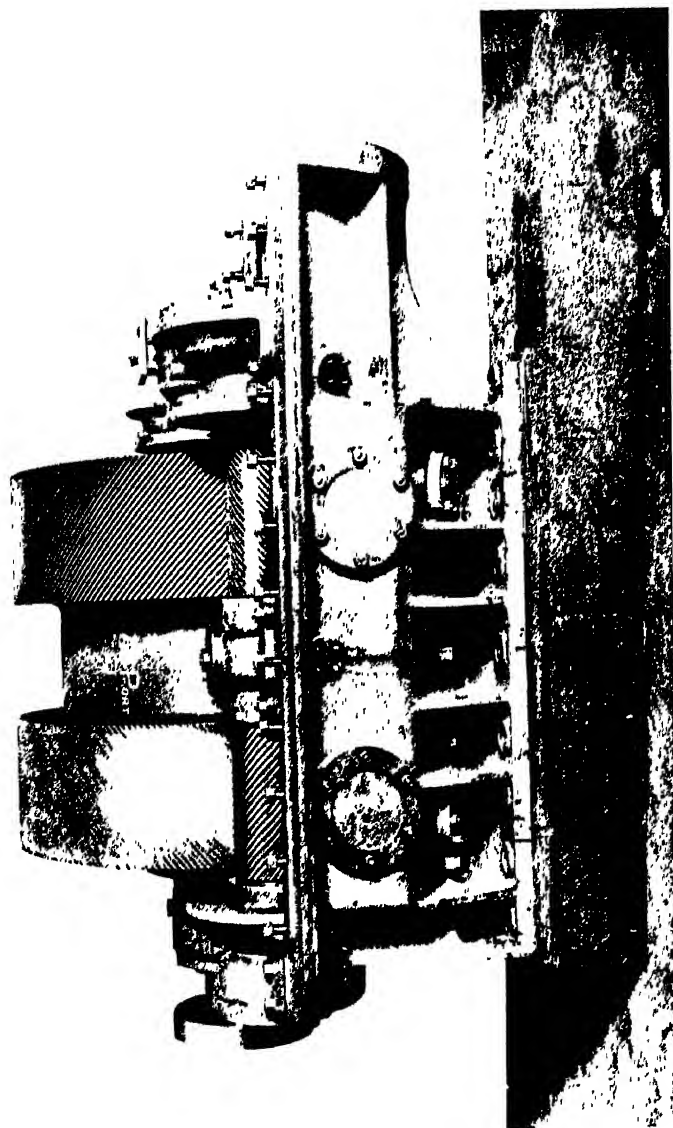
THE GEARING ON THE ISLE OF MAN STEAMER, KING ORRY
